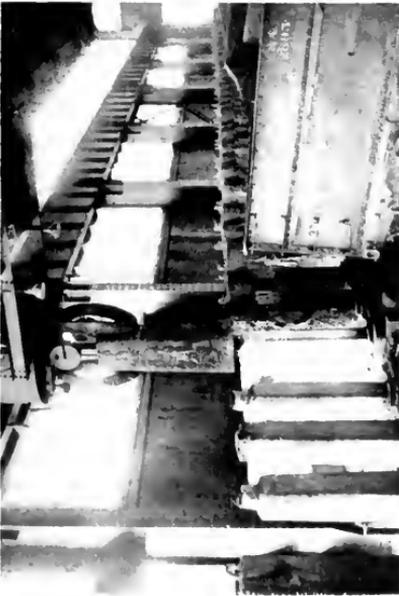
Ingot Stripper Crane Stripping Ingots in Soaking Pit Building
